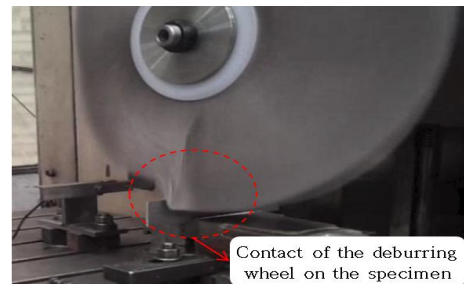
The indicator for measurement of deburring force by rotation of deburring wheel
